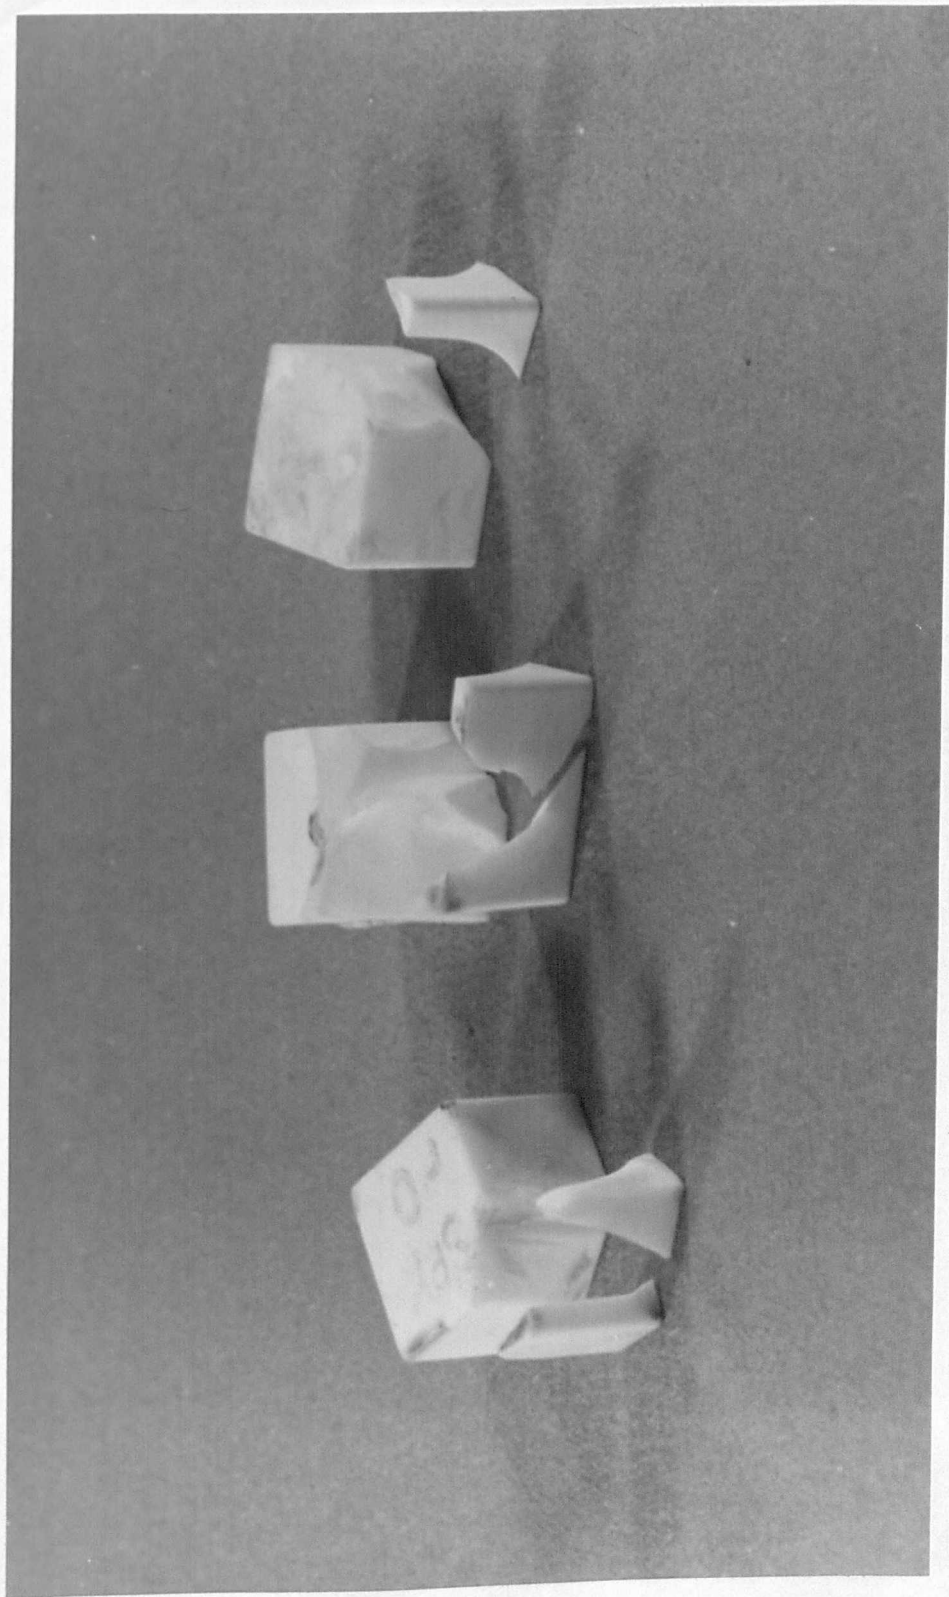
Modes of tool tip failure from lathe and test rig.
